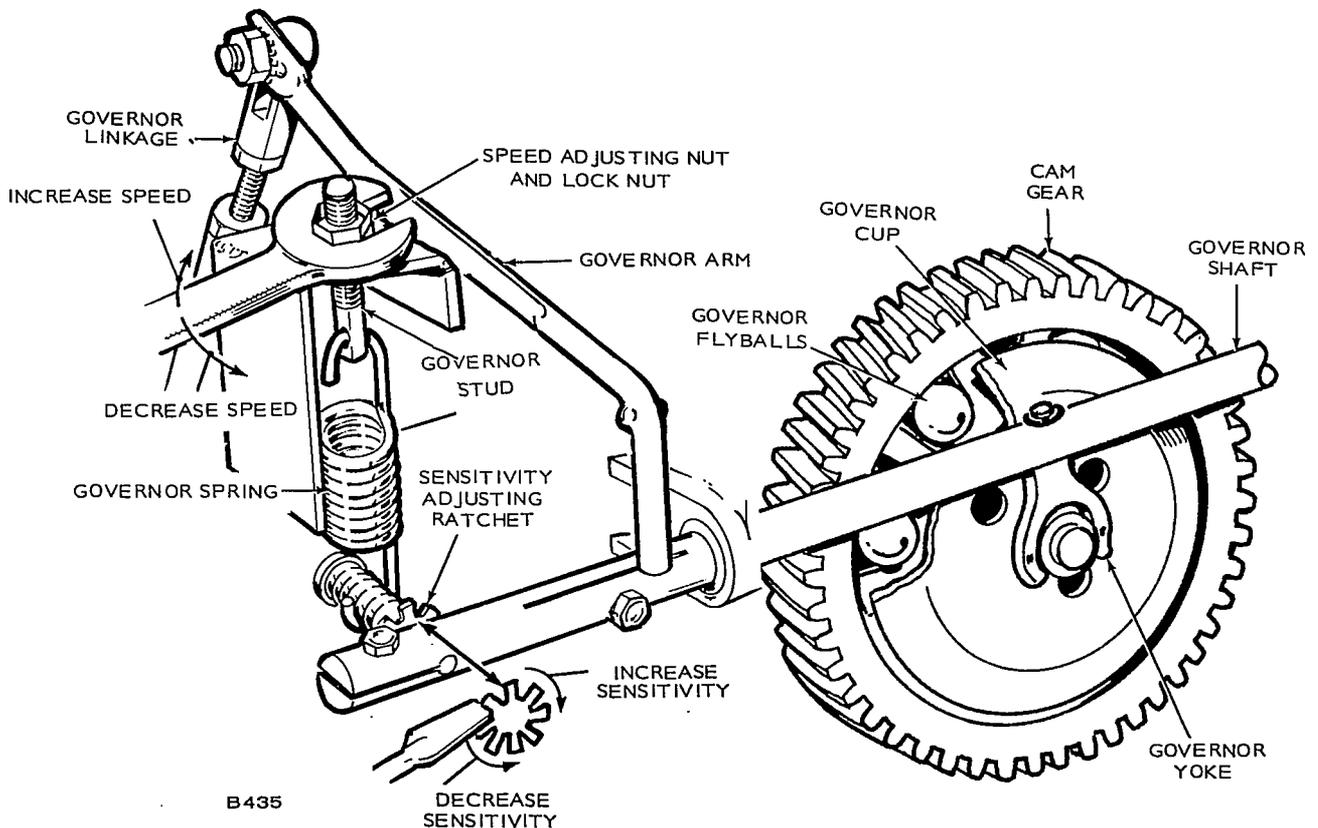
GOVERNOR ASSEMBLY AND ADJUSTMENTS
